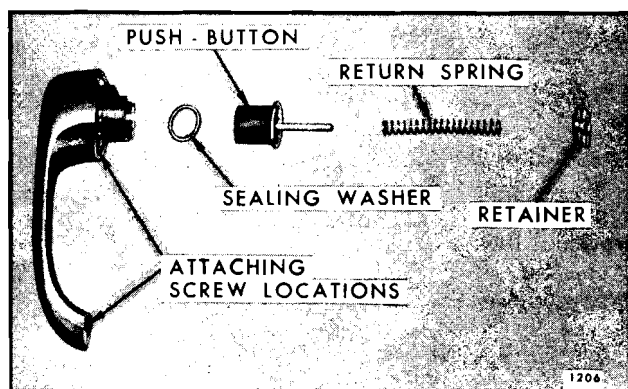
Front Door Outside Handle - All Styles Except "G" Styles
